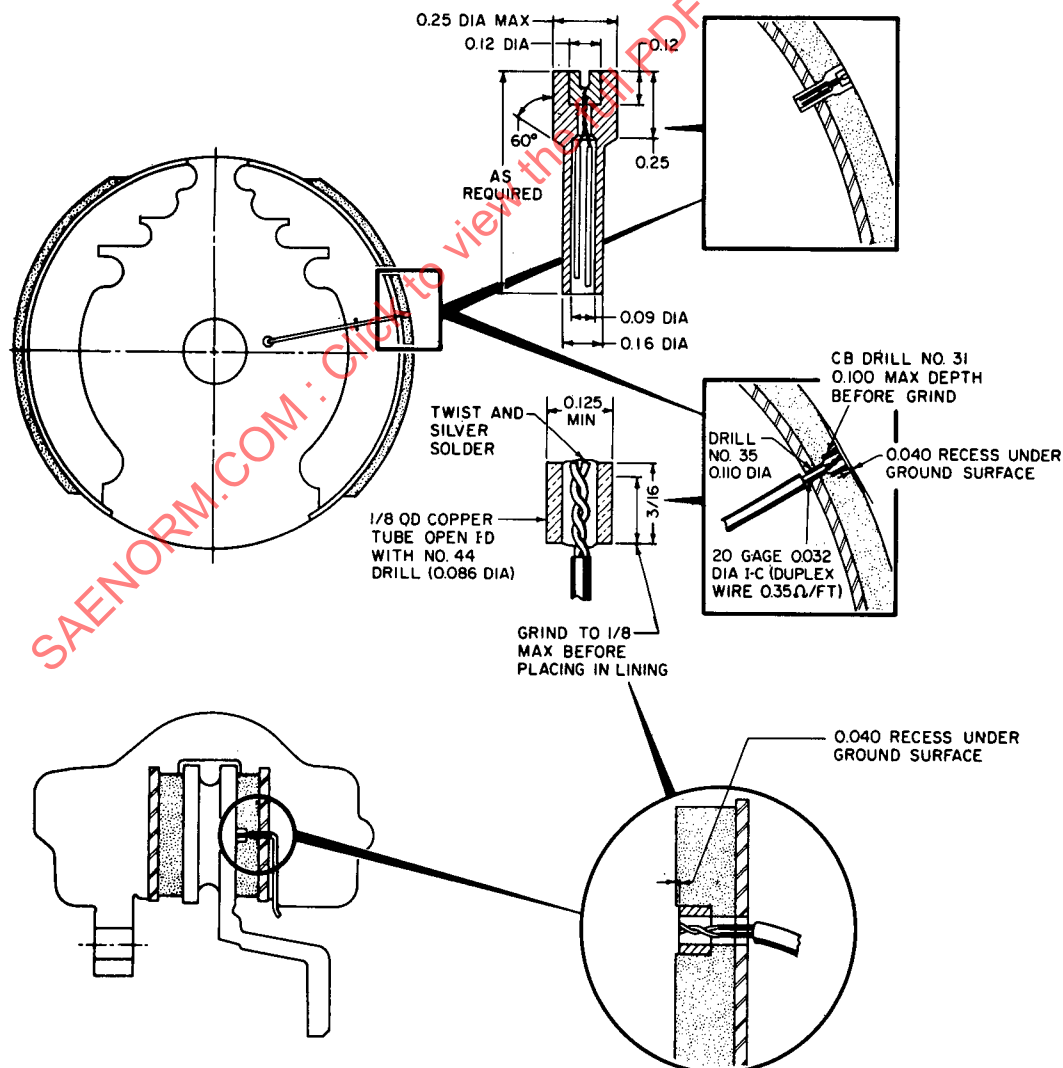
TYPICAL PLUG THERMOCOUPLE INSTALLATIONS
